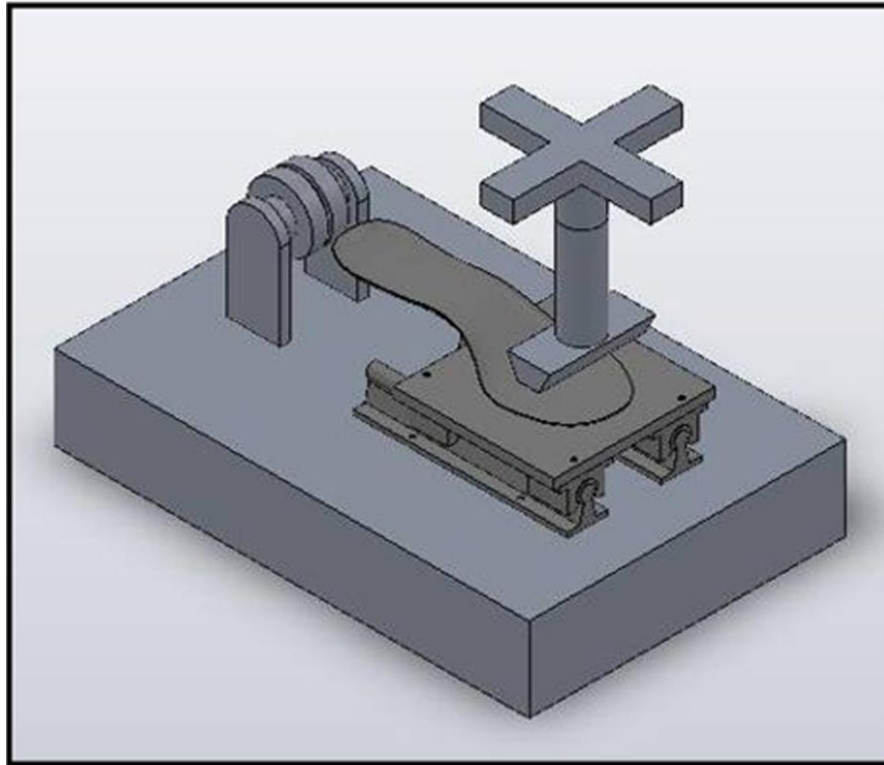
TEST FIXTURE SCHEMATIC DESIGN
